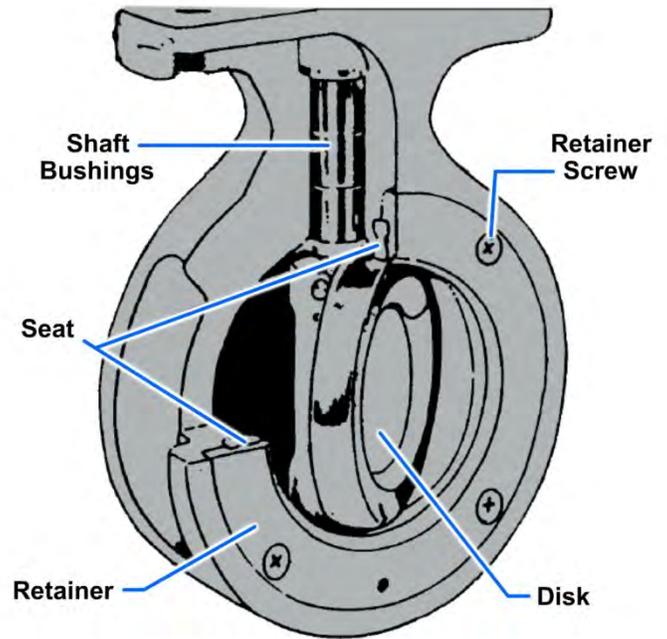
Cutaway view of a high-performance butterfly valve.
